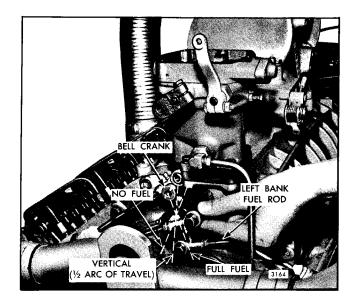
Adjusting Length of Left Cylinder Bank Fuel Rod
